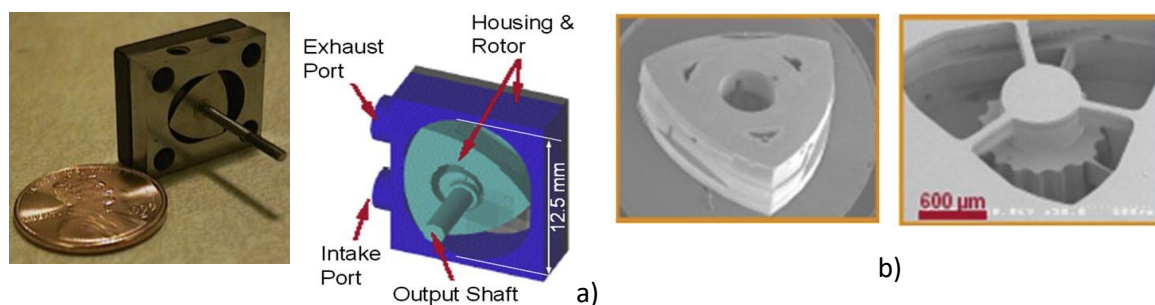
a) EDM technologies steel fabricated mini-rotary motor with a 10 mm rotor [46], [59]. b) micro-rotary motor [50].
